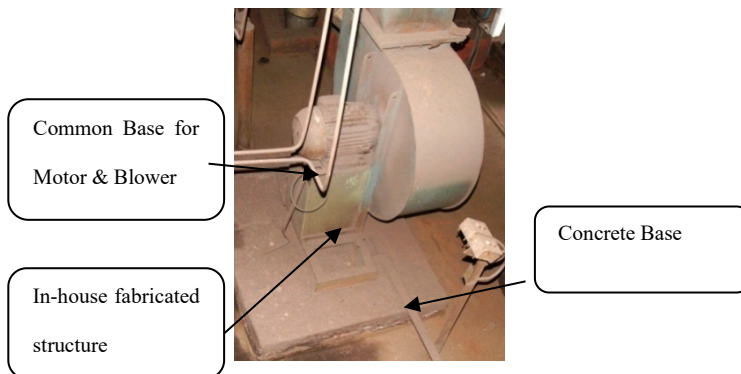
the Motor Mounted Blower (DBL-15)
